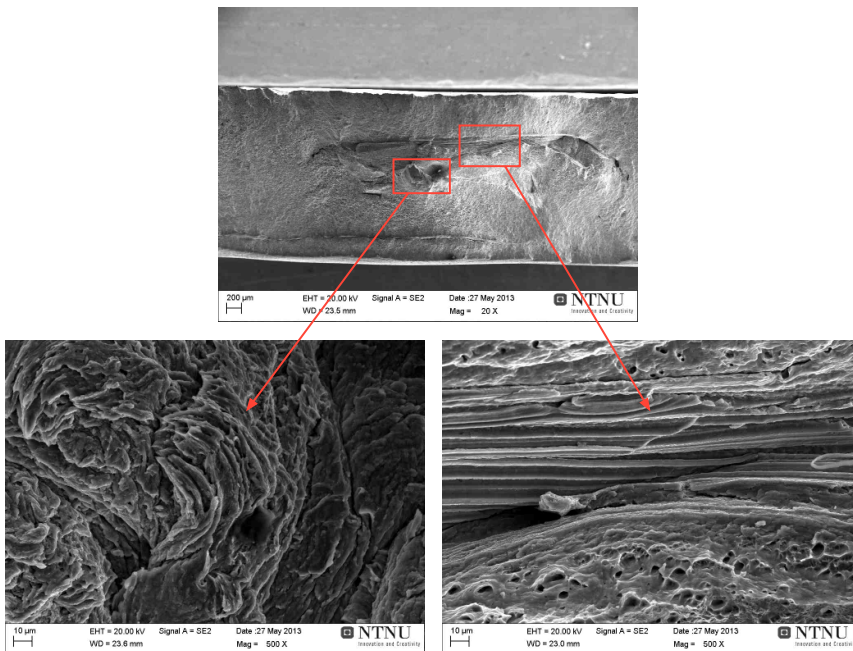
Close-ups of the fracture surfaces in the stir zone.
